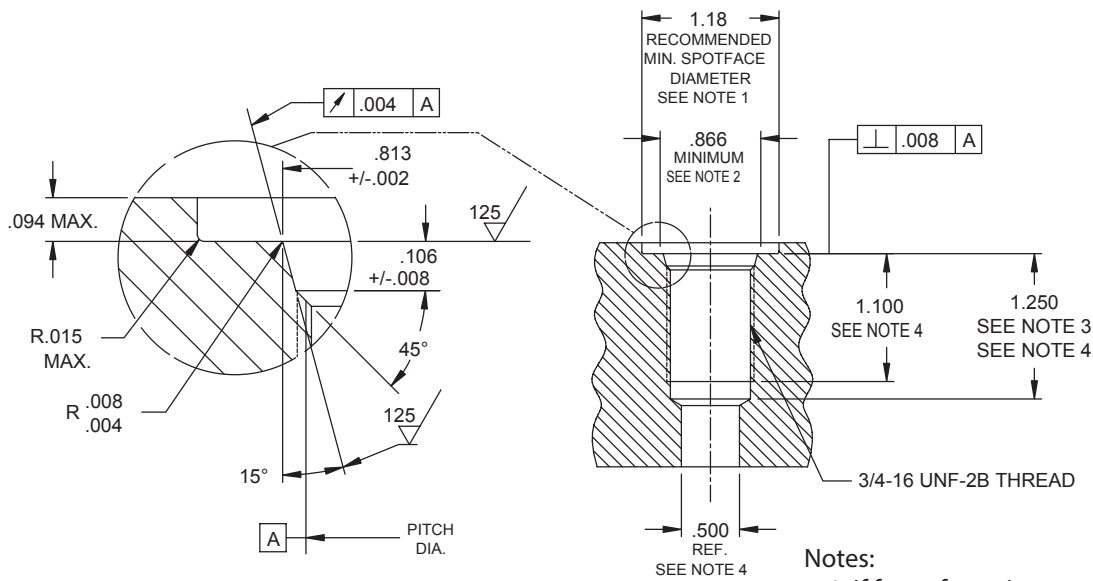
Mounting LDT in a Hydraulic Cylinder
